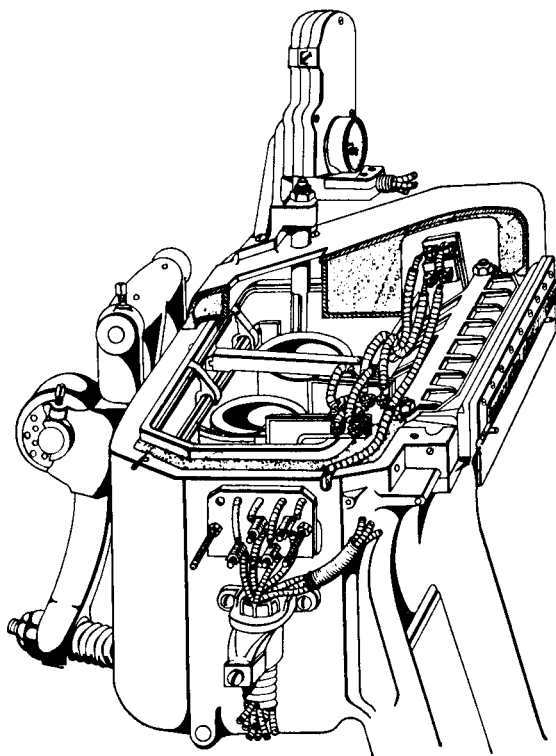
View of 42-em electrically-heated metal pot with cover removed to show heaters and method of wiring.
